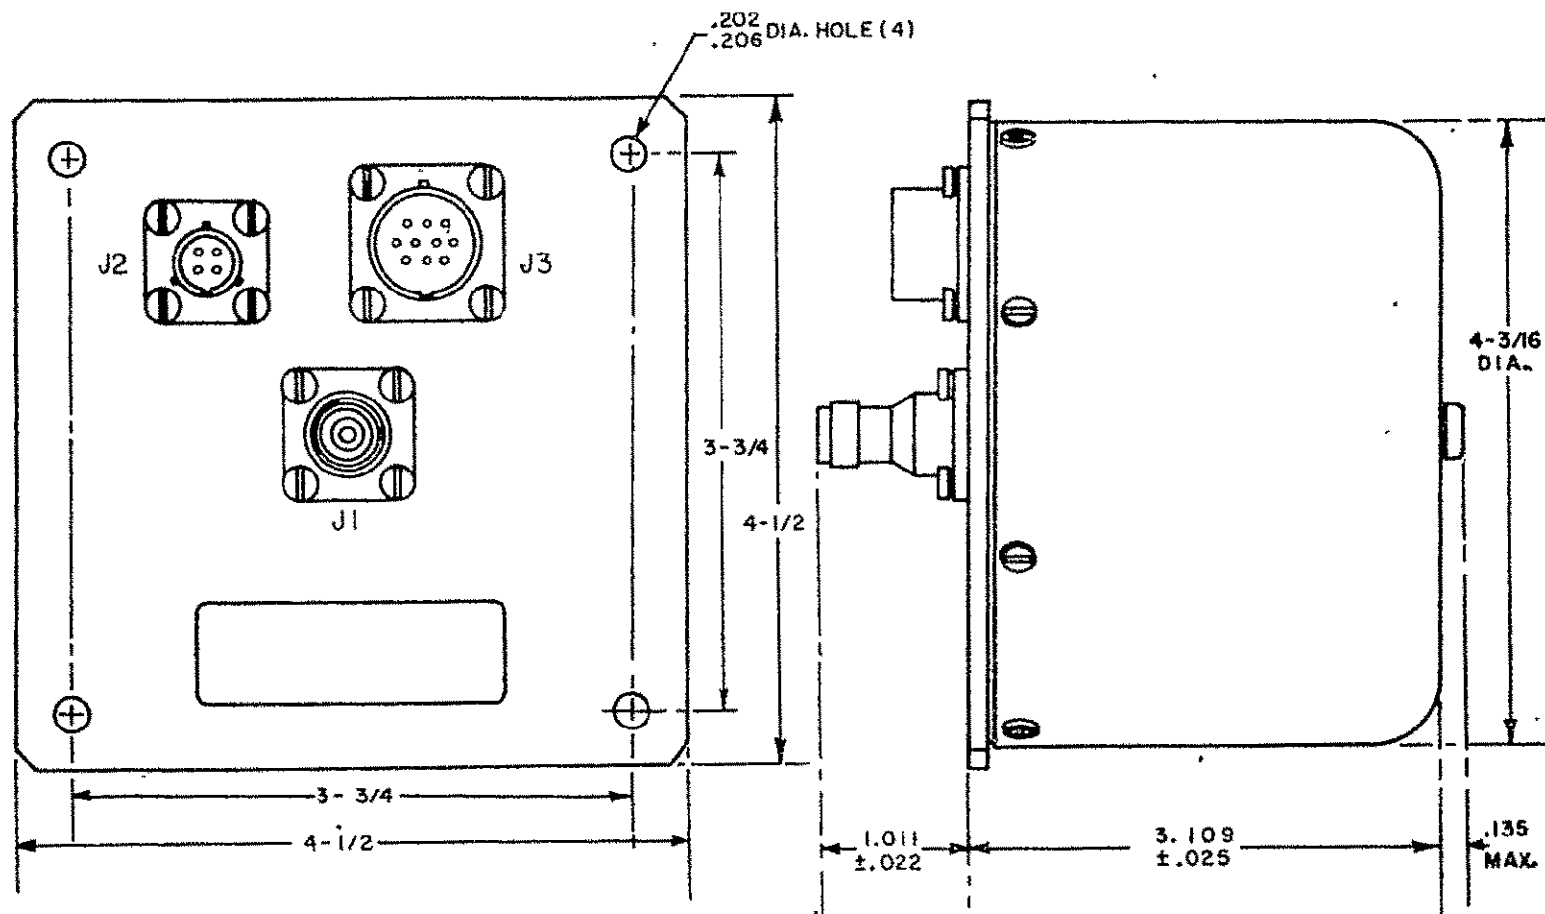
Outline Drawing of Command Receiver - Decoder
